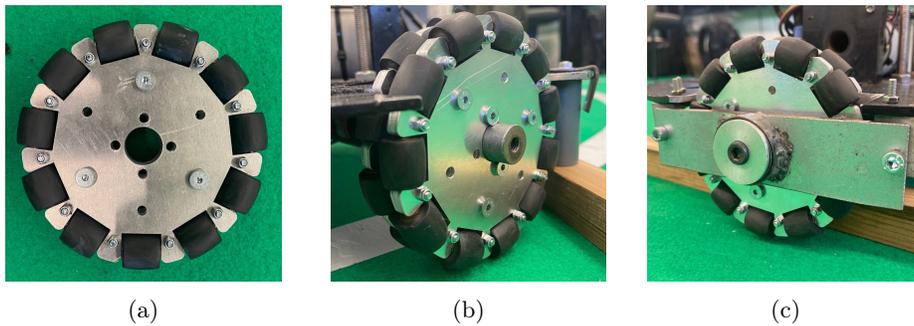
Omni-Wheels: (a) One wheel assembled; (b) Wheel mounted on the robot; (c) Wheel with the outside bearing.
